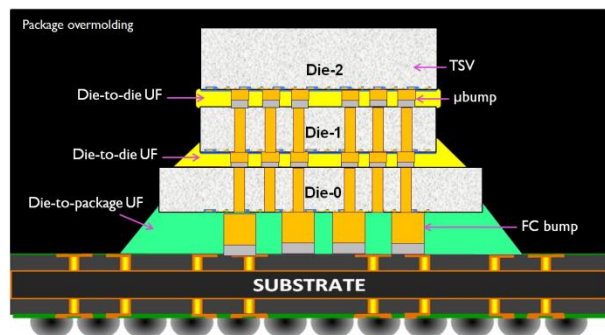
Typical stack-up in case of BGA package with multi-die stack.
